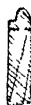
Section Showing Method of Making Beading for Clock Case.
